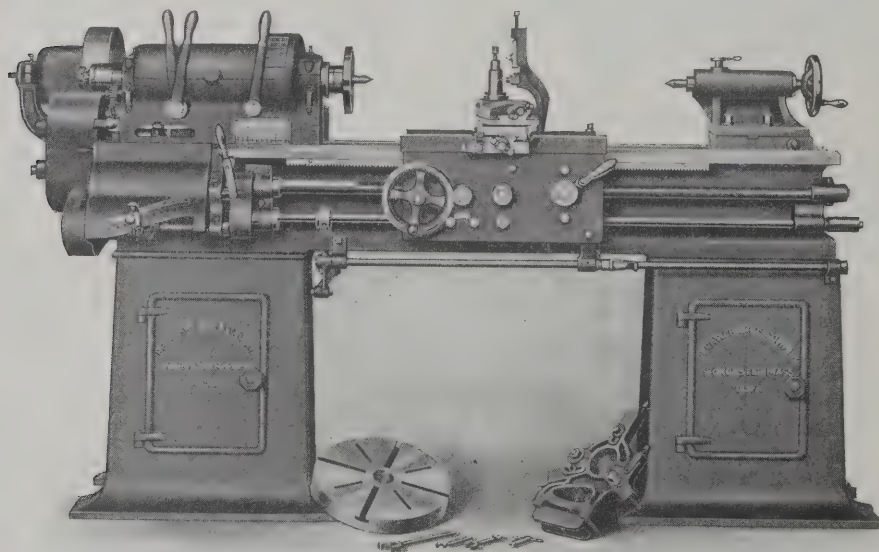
Geared-head Prentice Lathe with Reversing Mechanism incorporated
